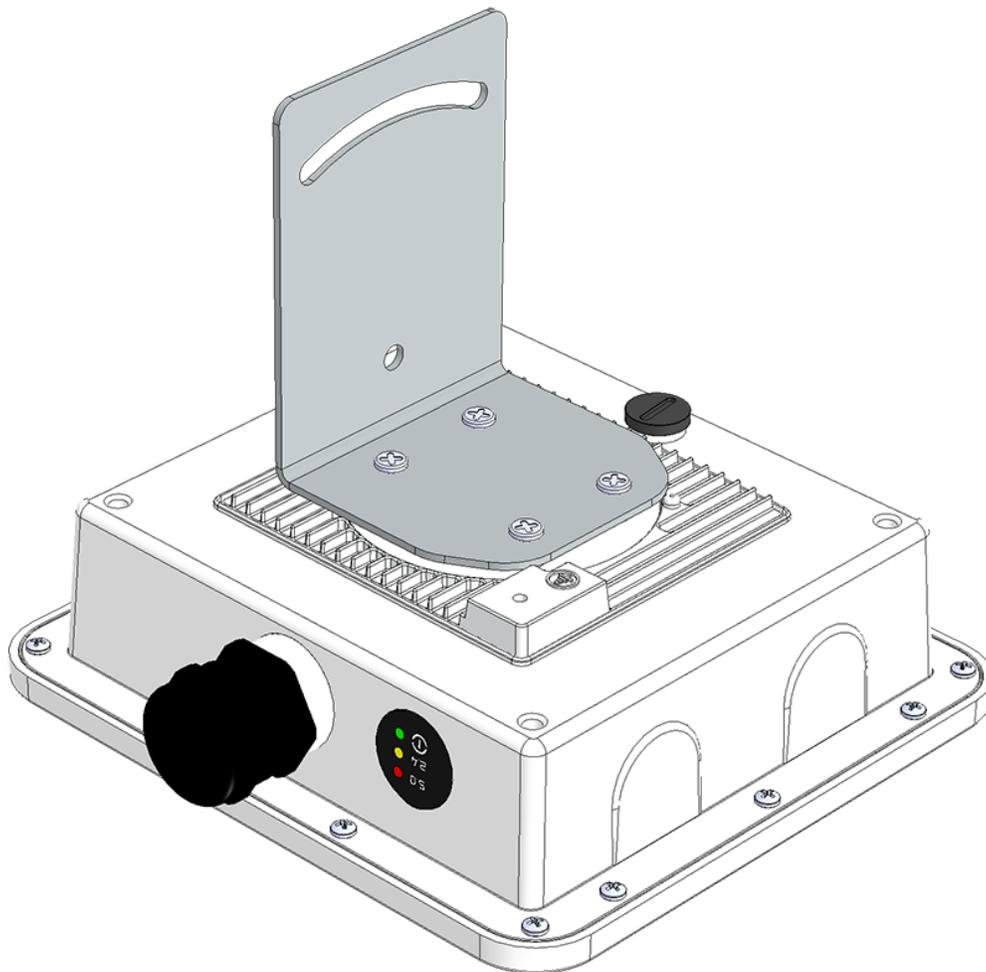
Mounting bracket alignment with the 2x2 outdoor AP
